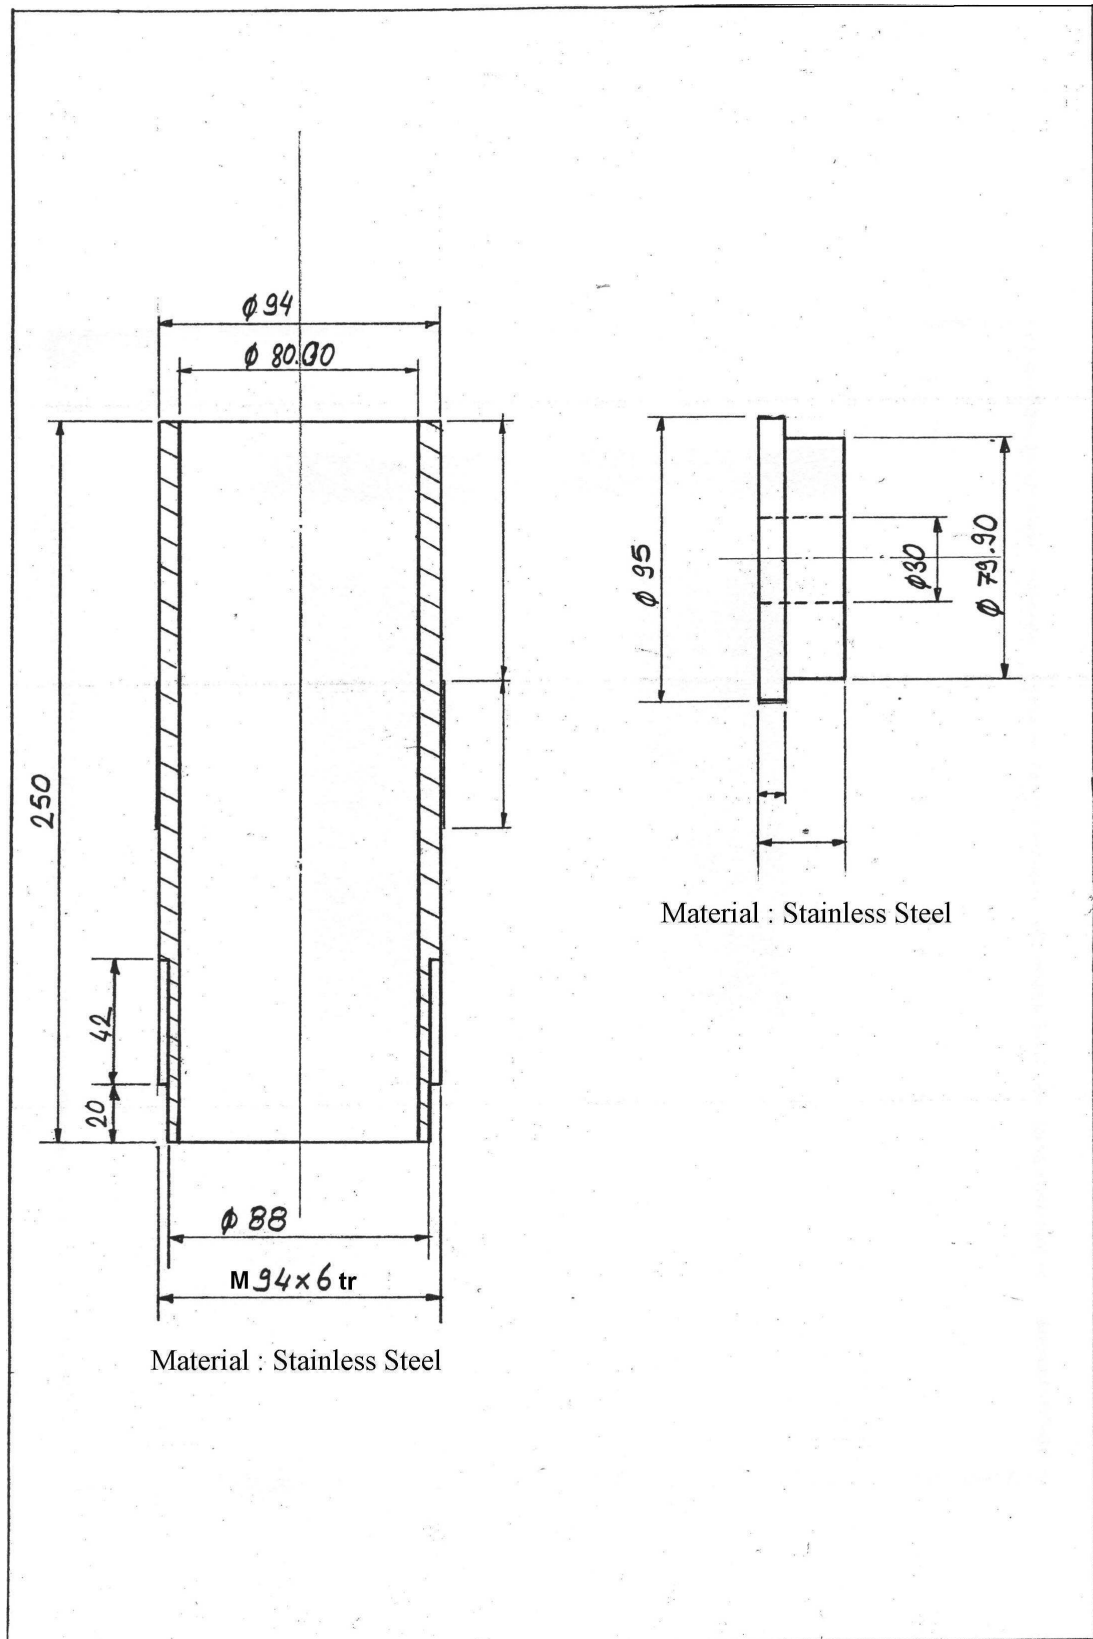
Technical drawing of chamber for pressure slip cast set-up
